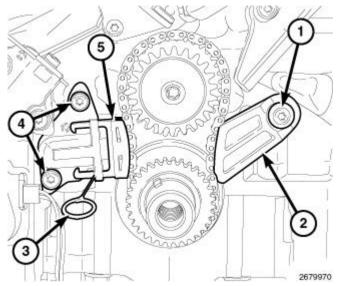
Primary Chain Tensioner, Tensioner Pin, Primary Chain Guide & Bolts Courtesy of CHRYSLER GROUP, LLC
